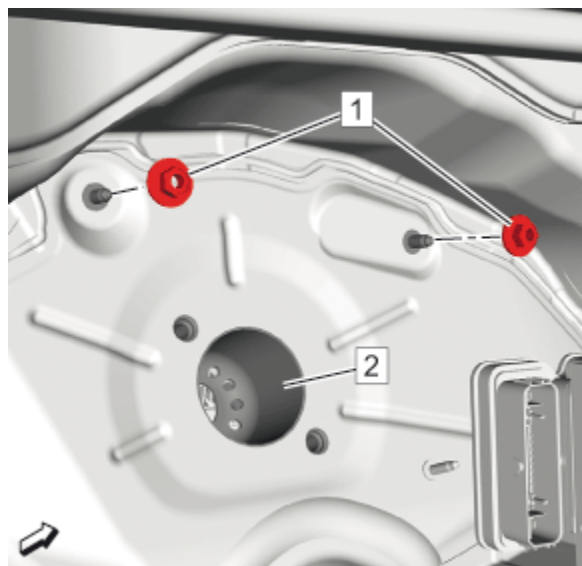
Brake And Accelerator Pedal Assembly And Nuts
